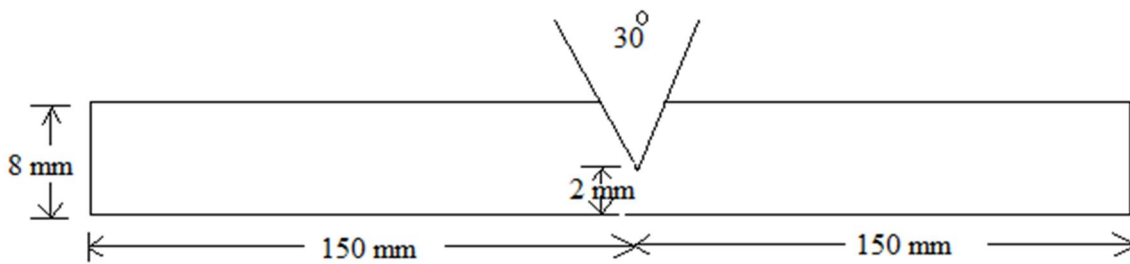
Welding geometry with groove angle  $30^{\circ}$ .
